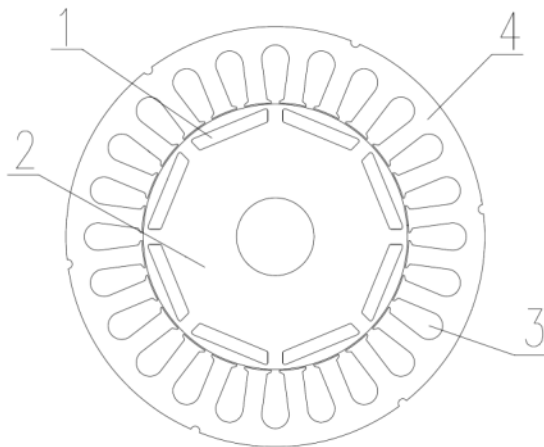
Cross-section of electrical motor for paraglider 1 – rotor slots for magnets; 2 – iron rotor core; 3 – stator slots; 4 – iron stator core.
